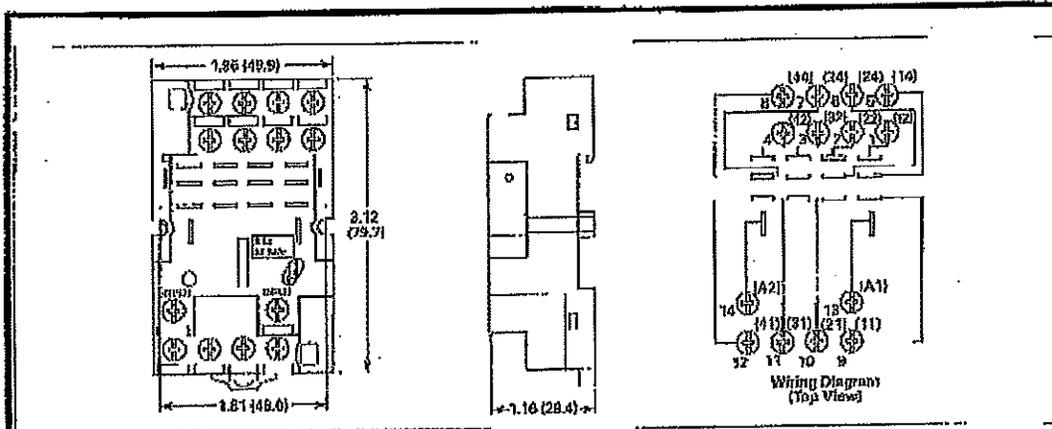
D7PAD — Approximate Dimensions in Inches (mm)
